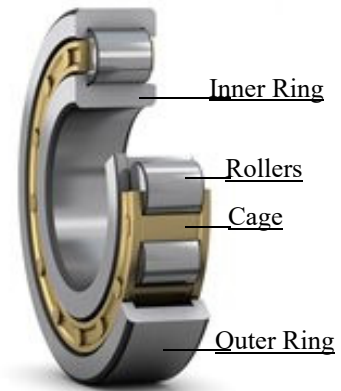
Cylindrical Roller Bearings, Single Row (31)
